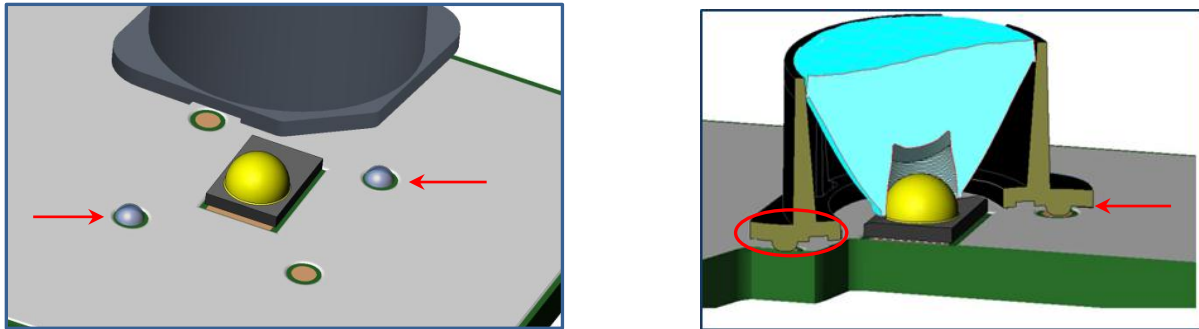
FLT assemblies can be fastened to the PCB by placing a small drop of glue in one or more of the pin recesses on the board. When properly attached, the alignment pin rests in the board recess and the flat bottom of the assembly is in contact with the top of the PCB.
